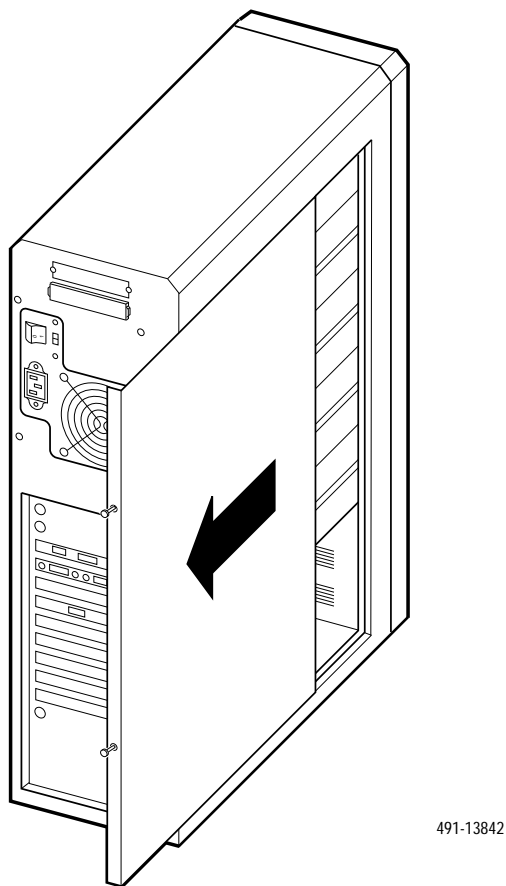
System 5000 — Disengaging Cover Locking Pins
